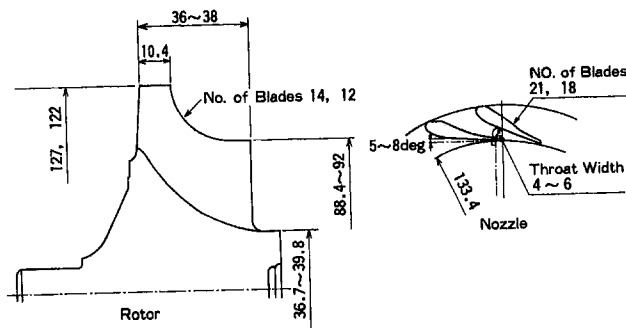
Basic dimensions (mm) of rotor and nozzle
